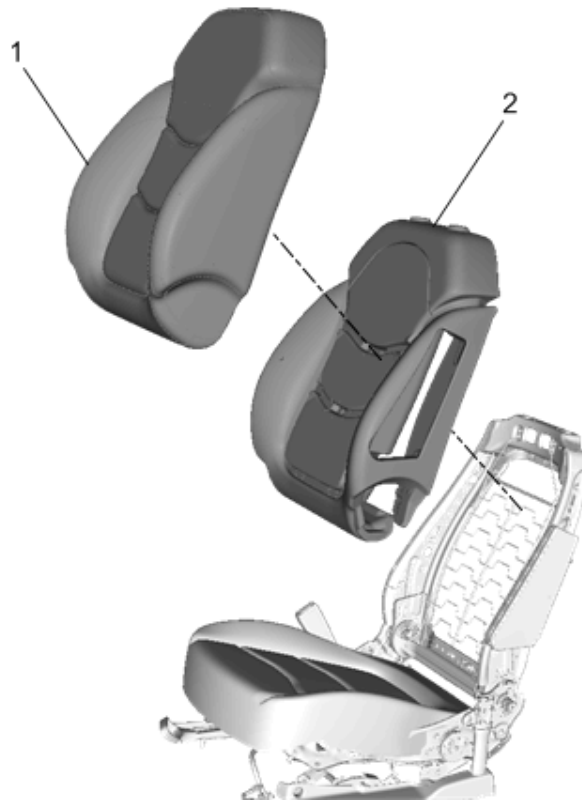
Driver or Passenger Seat Back Cover and Pad
